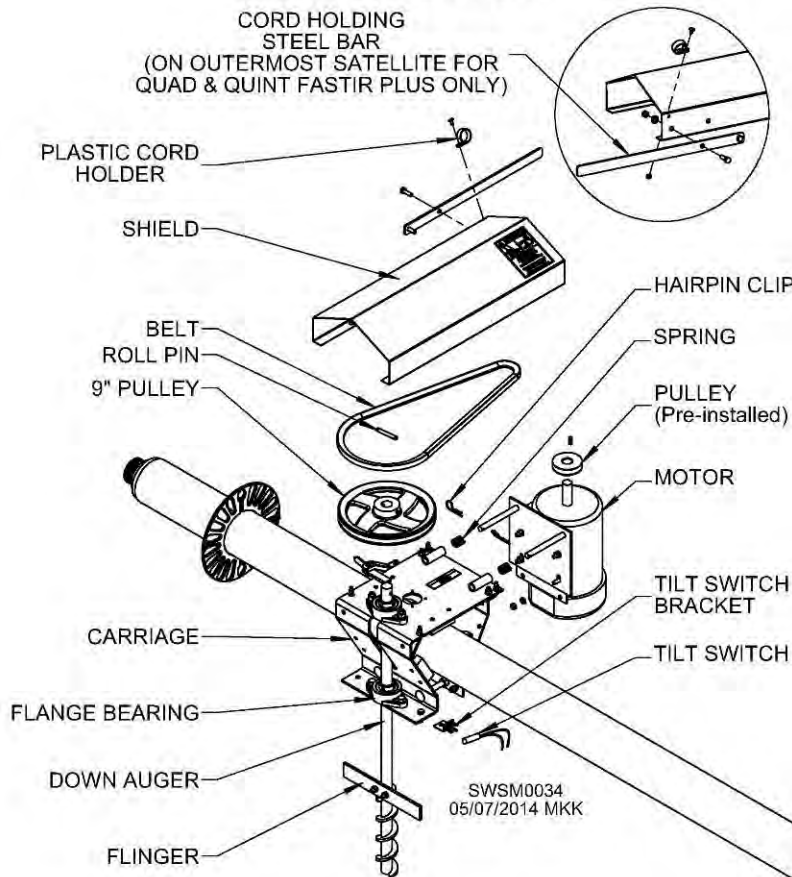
Primary and Satellite Carriage Assemblies, Exploded Views
